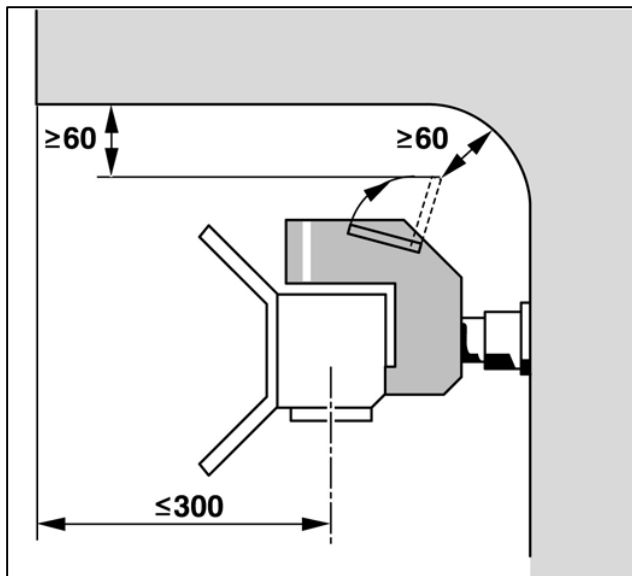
Hand lever clearance for pin coupling as per UNECE R 55 (side view)
